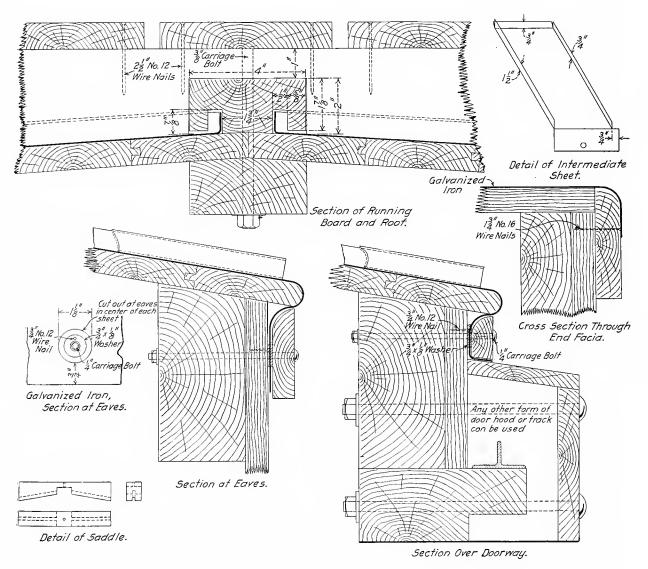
Details of No. 4 Outside Iron Roof. Chicago-Cleveland Car Roofing Company.
